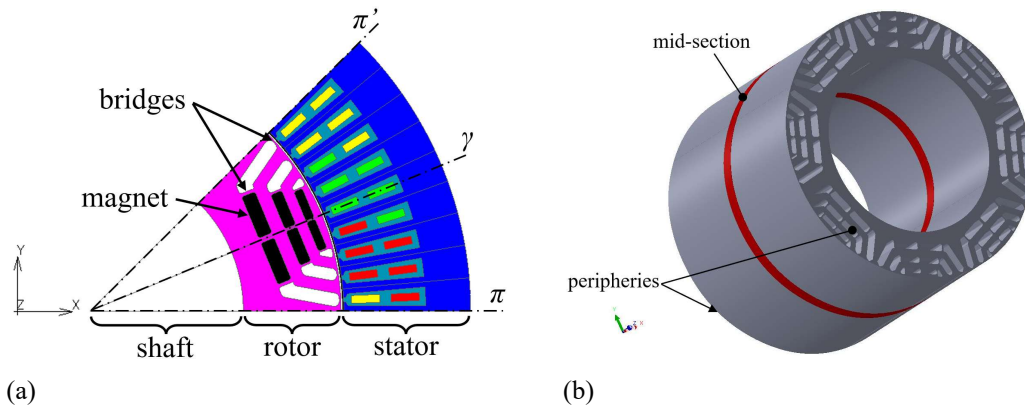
(a) A pole pitch of the machine. (b) Global view of the rotor.
